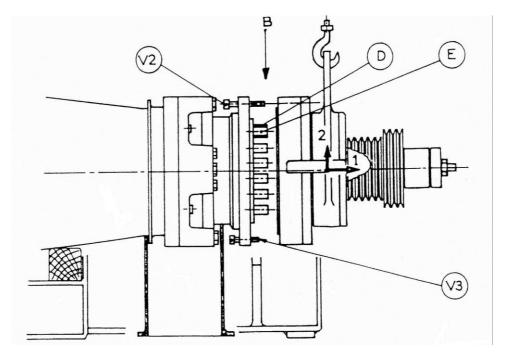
Partial Disassembly of the Cyclo Reducer
